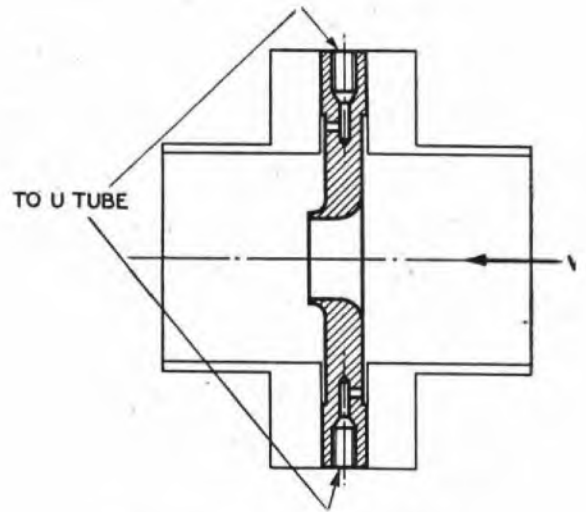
SECTIONAL VIEW OF NOZZLE.
